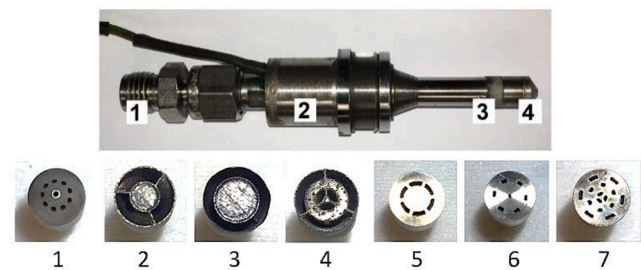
Photograph of a DI-CNG injector (1 – connection to the gas supply; 2 – solenoid; 3 – injector nozzle; 4 – interchangeable nozzle head) and 7 different nozzle head designs.
